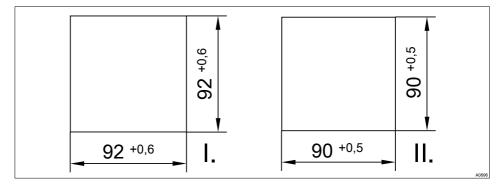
Mounting - control panel installation DULCOMETER® D1Cc
